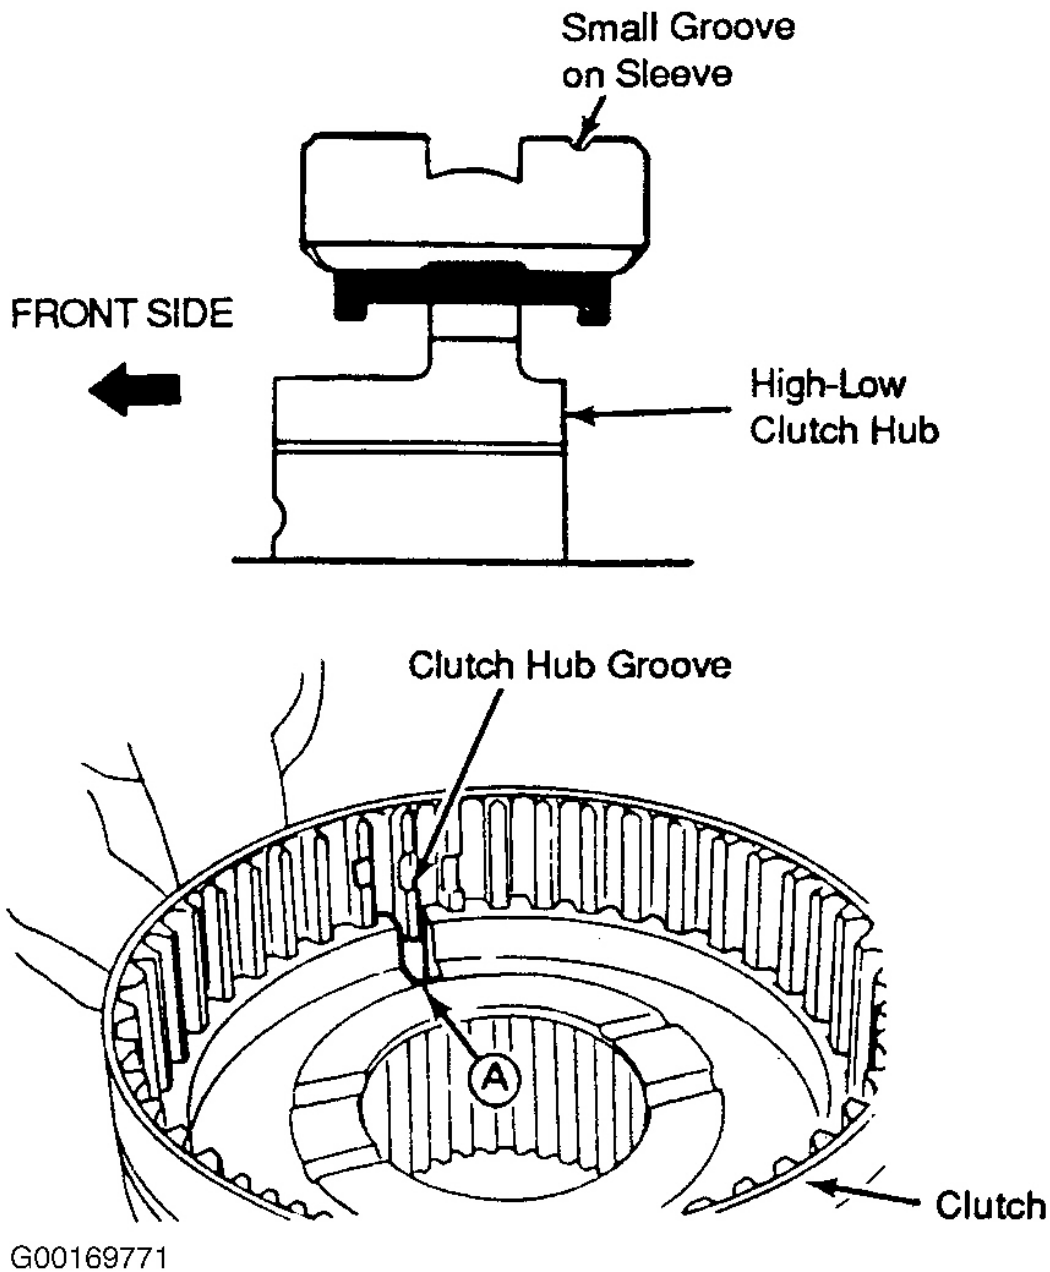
Identifying High-Low Clutch Hub Groove & Sleeve
